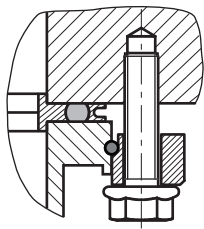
Flange connection ISO-K to ISO-F, hexagon head screw and tapped hole
